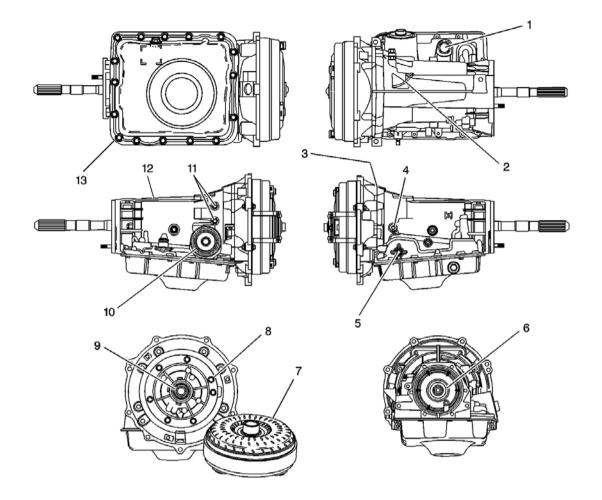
Leak Inspection Points Courtesy of GENERAL MOTORS CORP.
